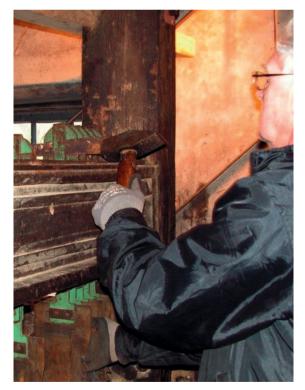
Knocking a key into a wedge, inserted through the upper crosshead.
